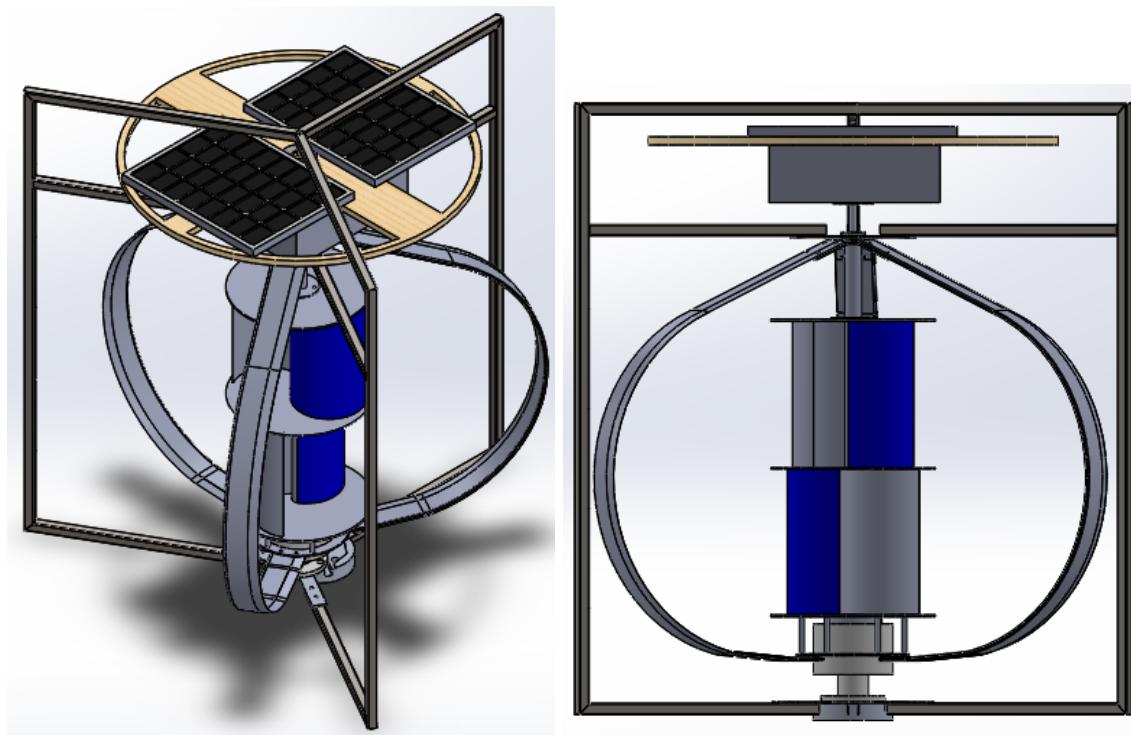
Final CAD Design — left: Isometric View, right: Front View
